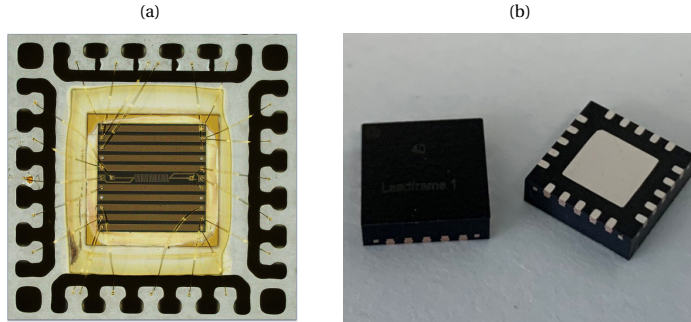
(a) An optical micrograph of the TCC with a Diamond heat spreader sintered to the die-pad of the lead frame. Electrical connections to the chip are established by wire bonds connecting the chip to the package bond pads. (b) Final optimized thermally enhanced PQFN packages are over-molded and singulated.
